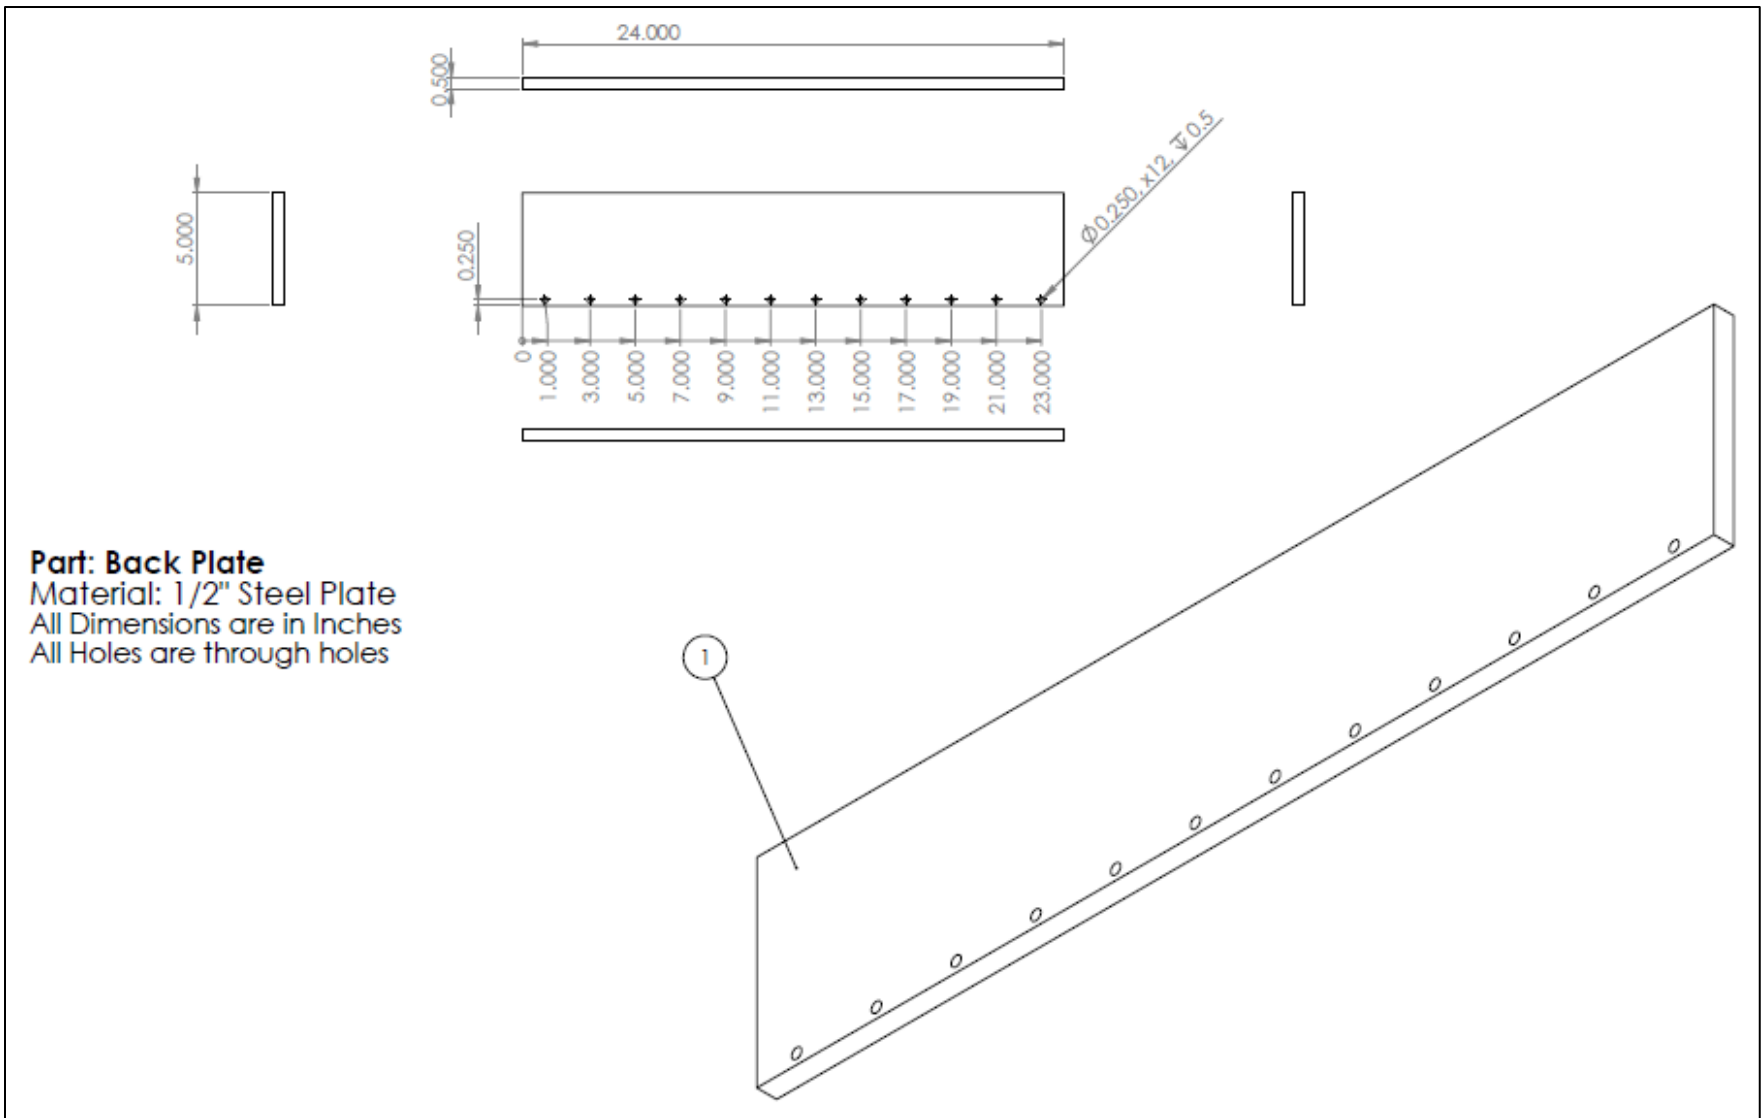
Final Back Plate Design Technical Drawing for Cavitation Tunnel
